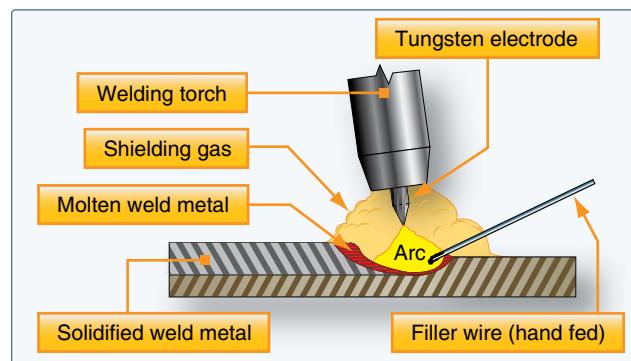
Tungsten inert gas (TIG) welding process.
